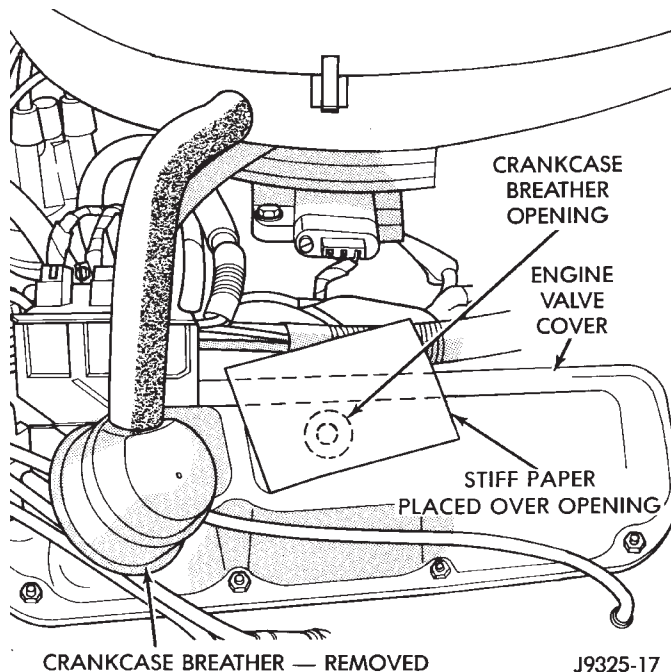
Check Vacuum at Crankcase Breather Opening—Typical
